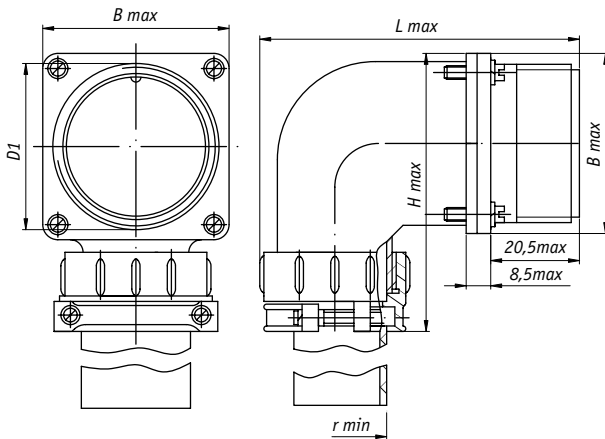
Fixed connector plugs and sockets (modular BUN) with elbow pipe and nut for non-shielded cable
